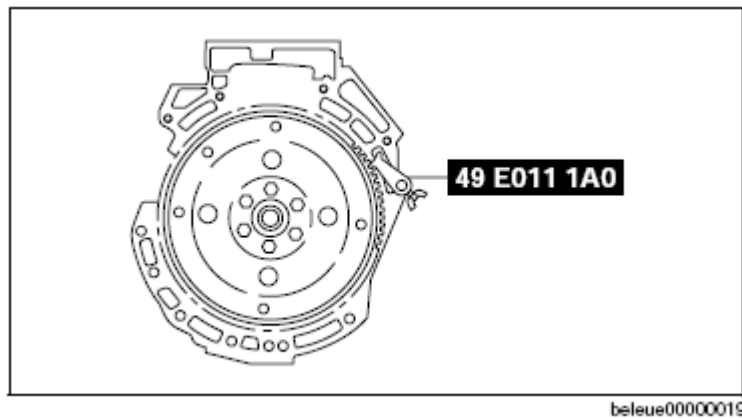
Identifying SST (Crankshaft Pulley Lock)
